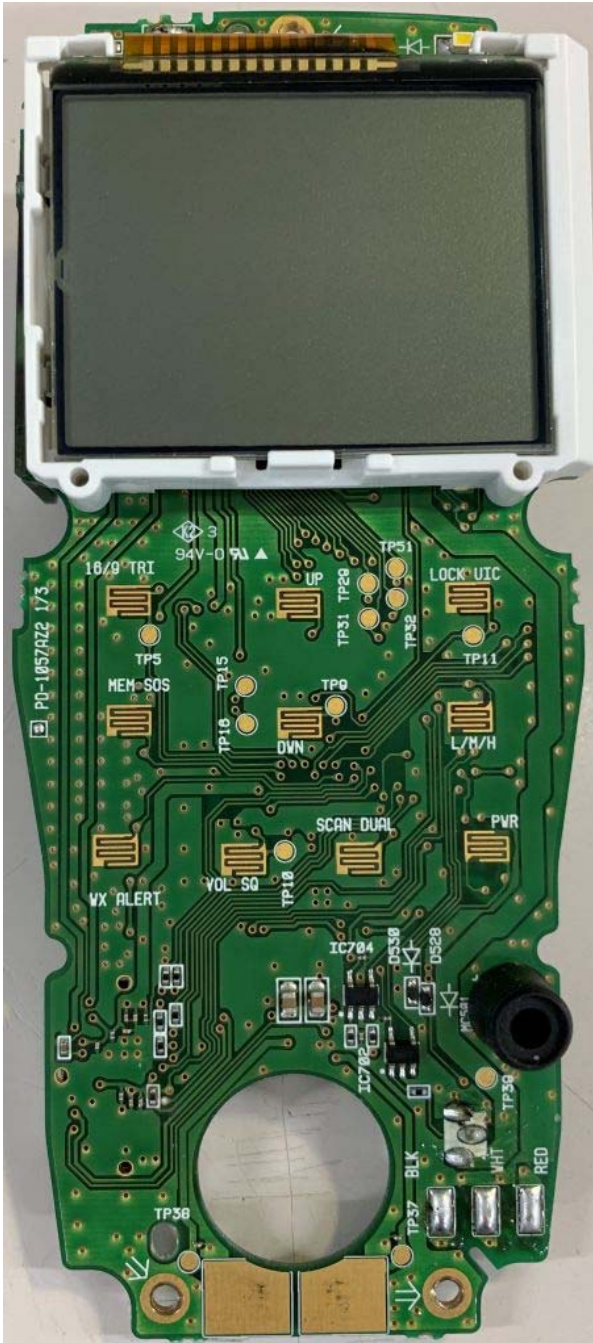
Internal Photo – Main PCB Display Side – Display Removed
